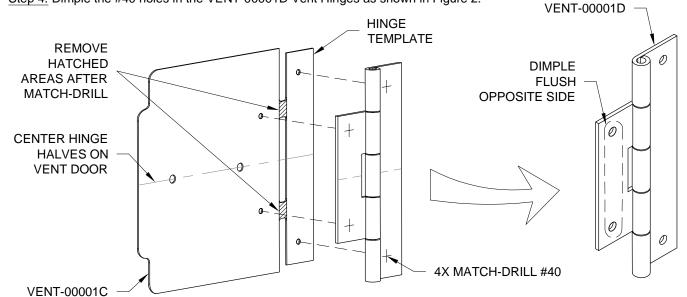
MATCH-DRILL & DIMPLE HINGES
